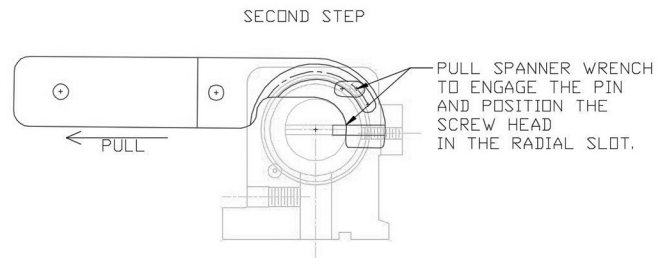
Pull the spanner pin into the hole in the spindle.
